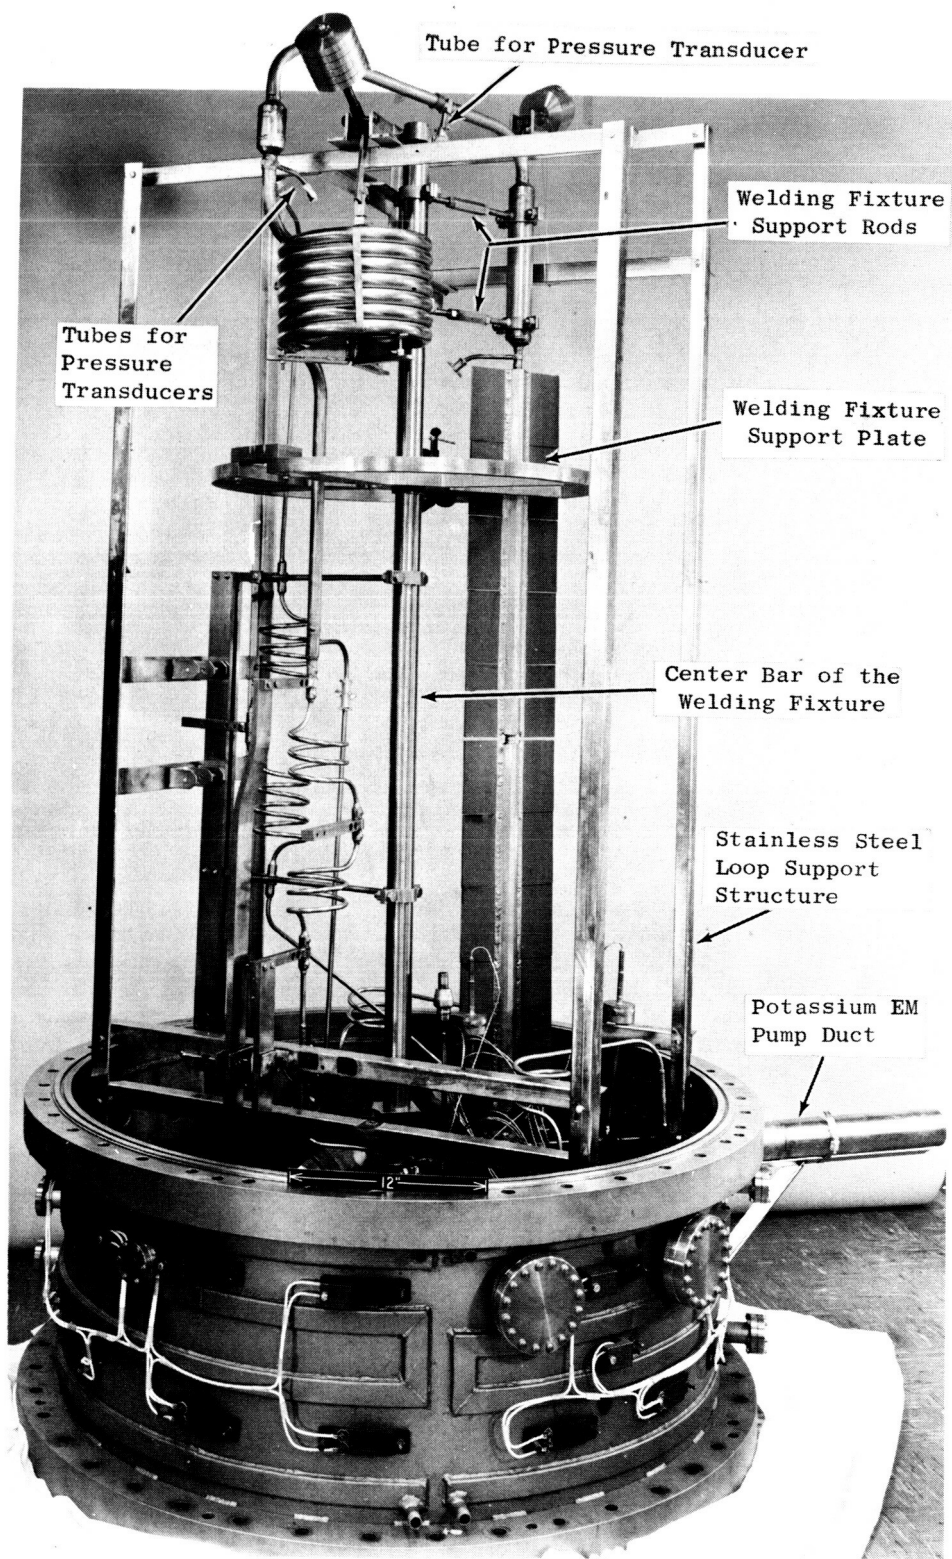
T-111 corrosion test loop and chamber spool piece during transfer of loop from support structure to welding fixture.
